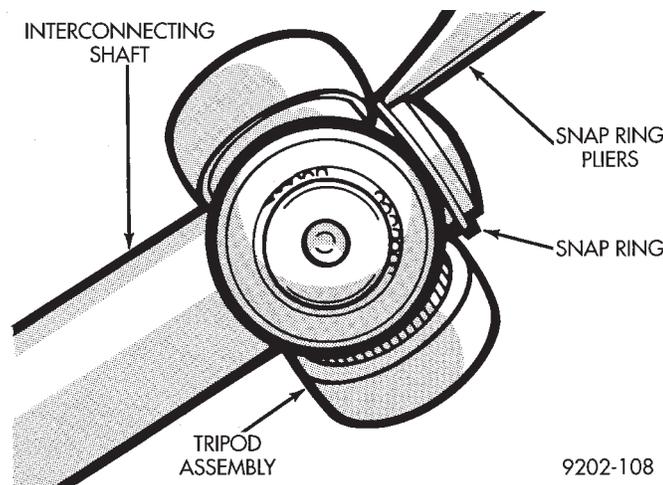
Outer Tripod Retaining Snap Ring Installation
